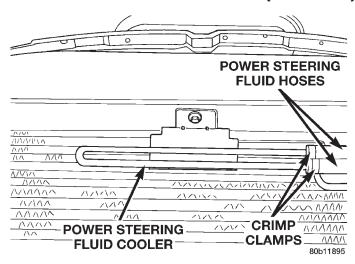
Hose Clamps At Power Steering Fluid Cooler
